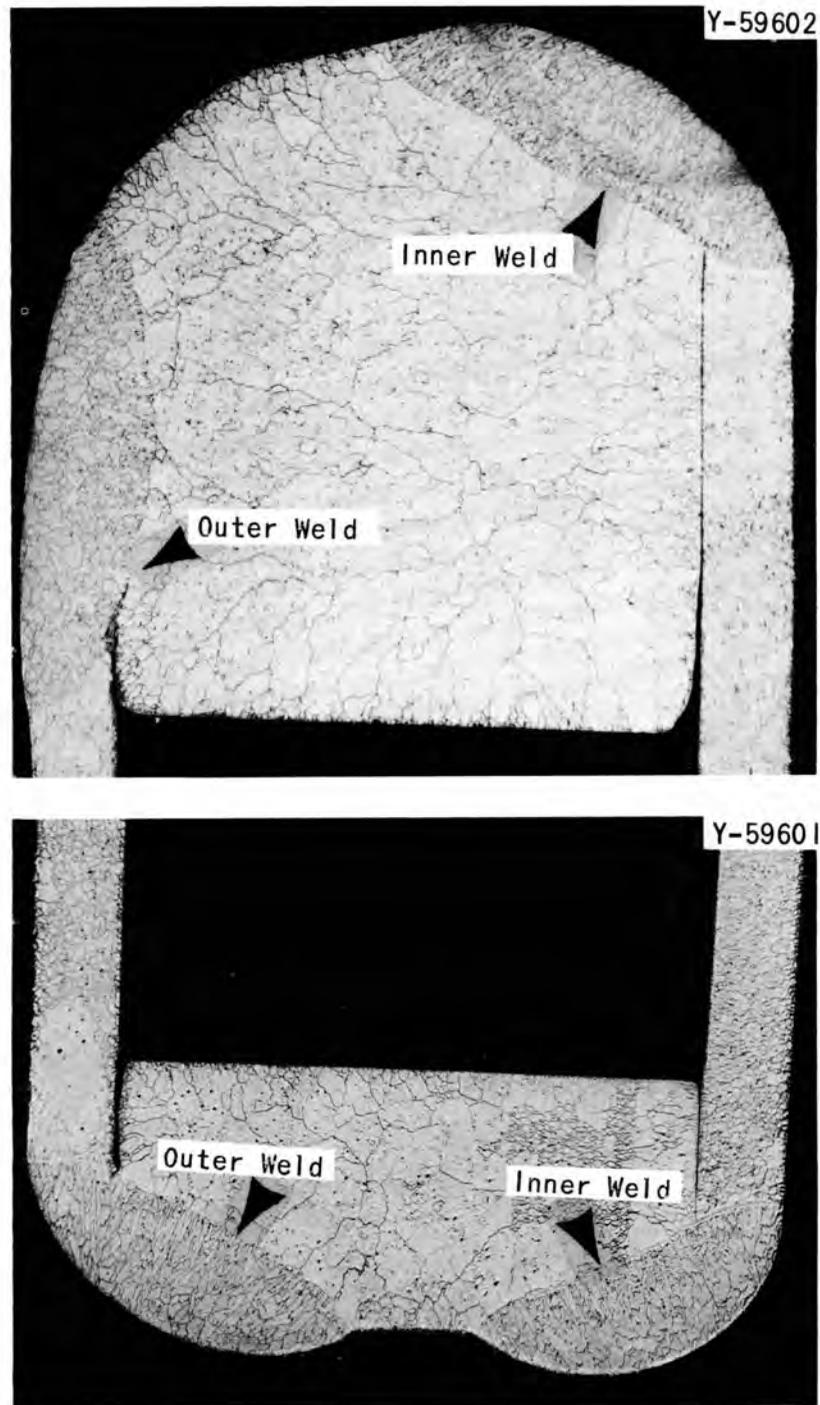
Sections Through Closure Welds on MSRE Control Elements.
